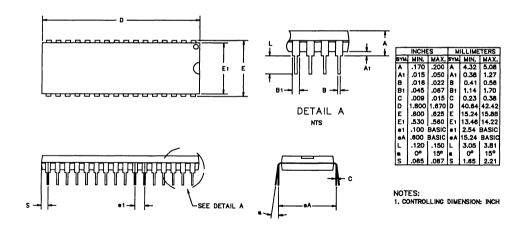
32-lead plastic DIP customer package outline (.600 inch)
